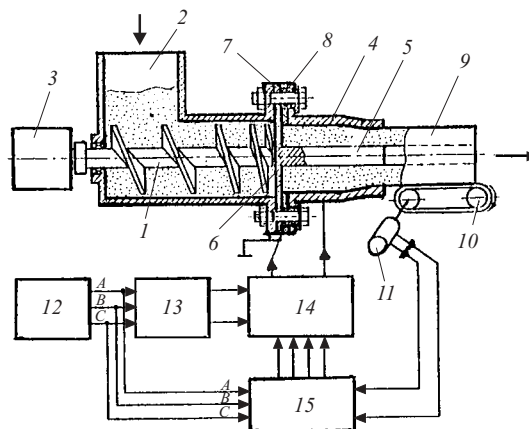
Structural scheme of a set for continuous production of tubular molded pieces.
